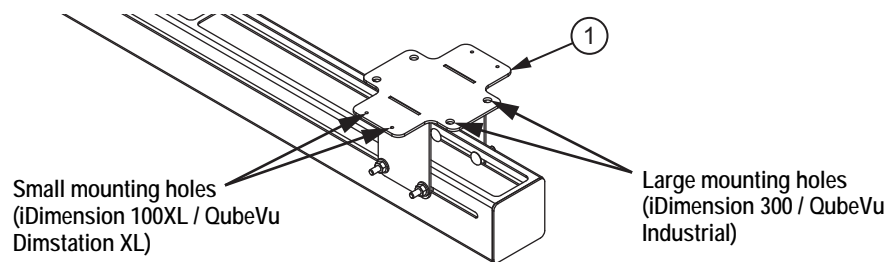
Camera Mount Weldment Mounting Holes
